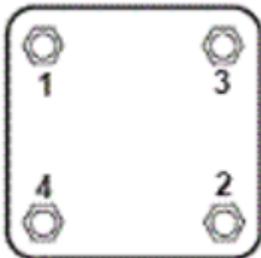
Torque Pattern for Attaching CP Package to a Heatsink
